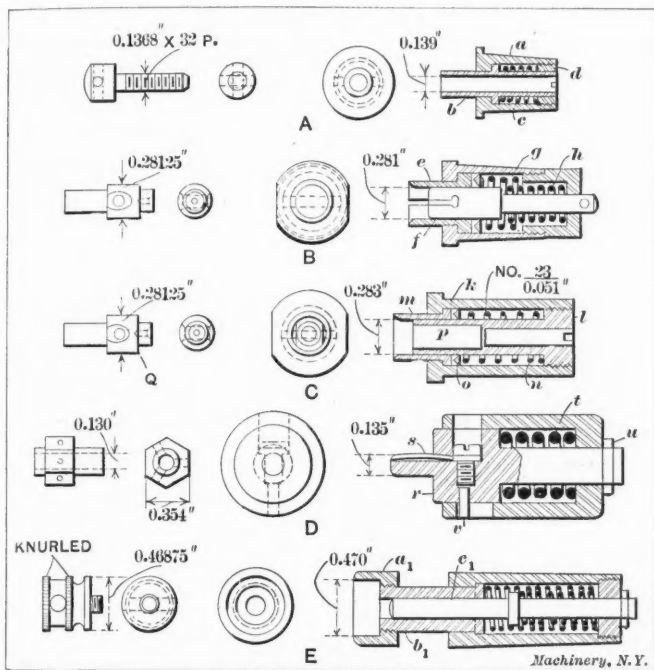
Representative Types of Transferring Bushings and the Work they were designed to hold
